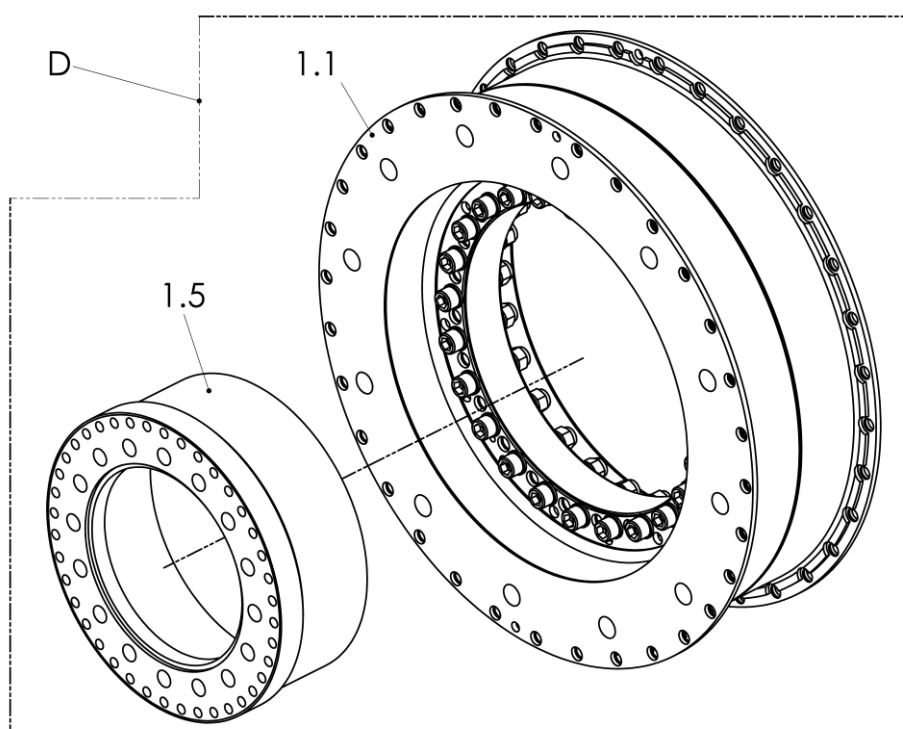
Placing the pot (1.5) inside the assembly (1.1)
